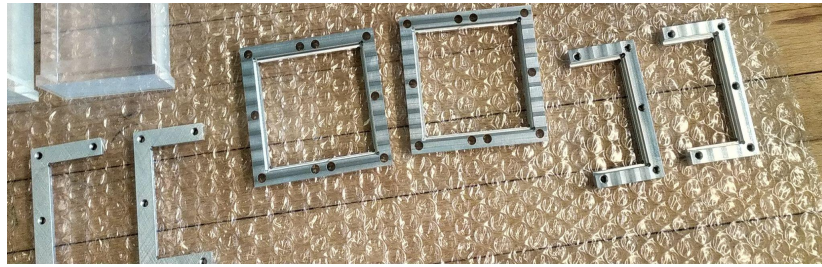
Rectangular clamps fabricated by the mechanical workshop of the University of Zurich to couple the lightguides to the scintillators.
